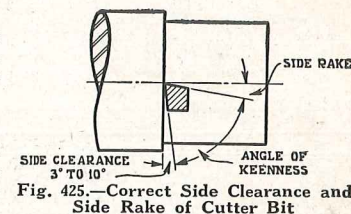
Correct Side Clearance and Side Rake of Cutter Bit
